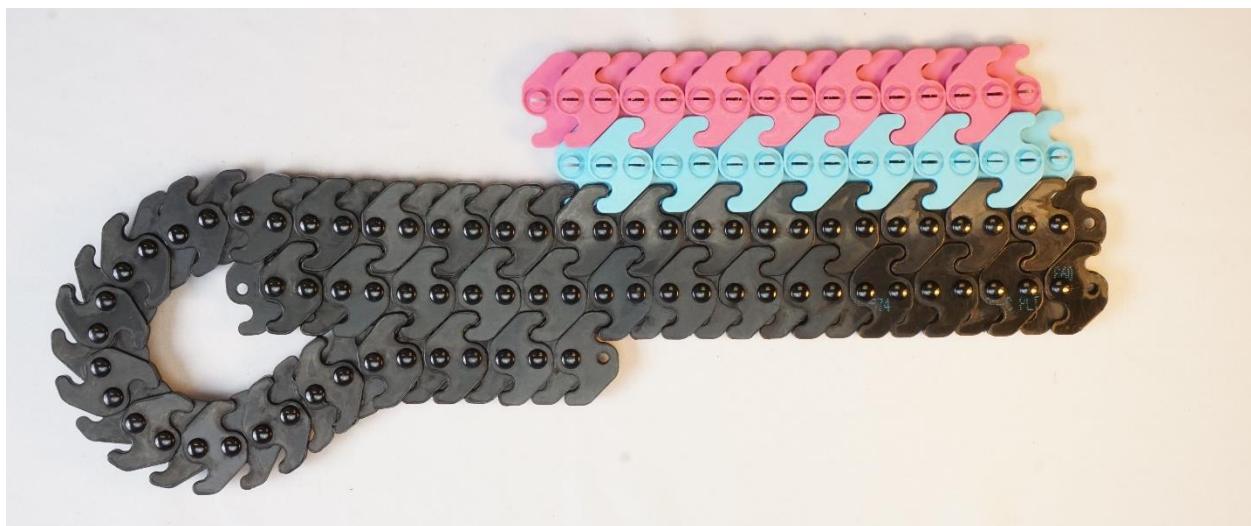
3D printed pieces connected to laser cut pieces showing their compatibility.
